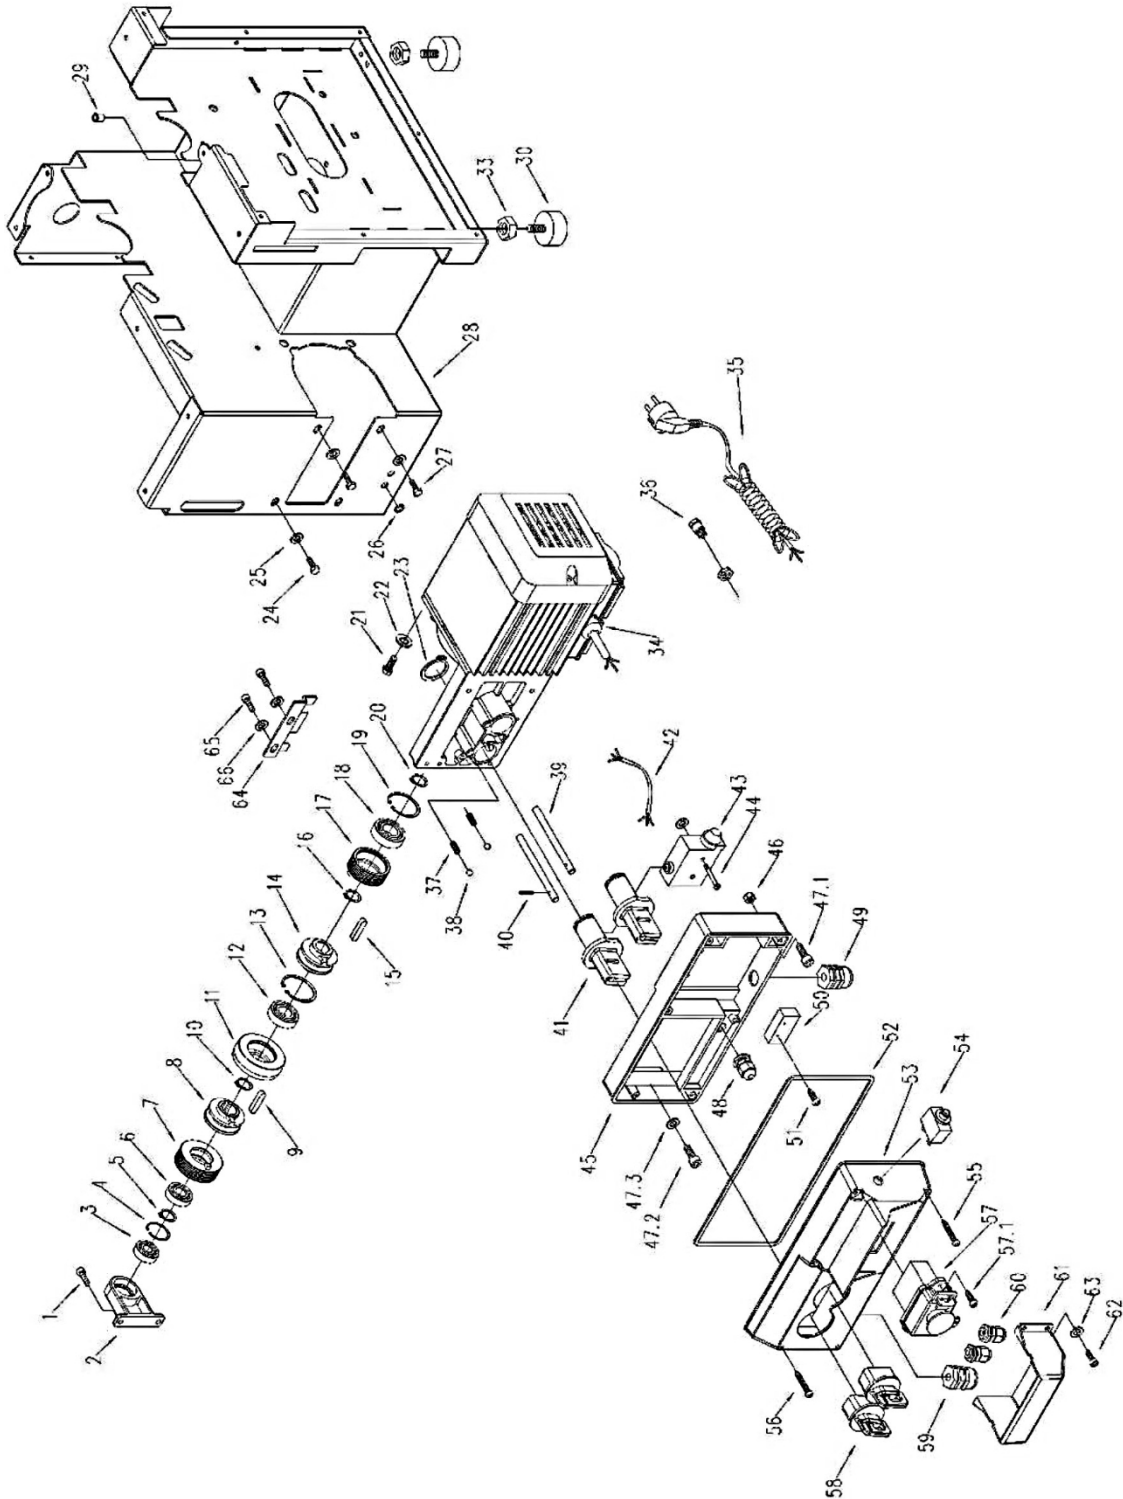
Spare parts drawing 1 Universal multi-purpose combination machine UMK 6
